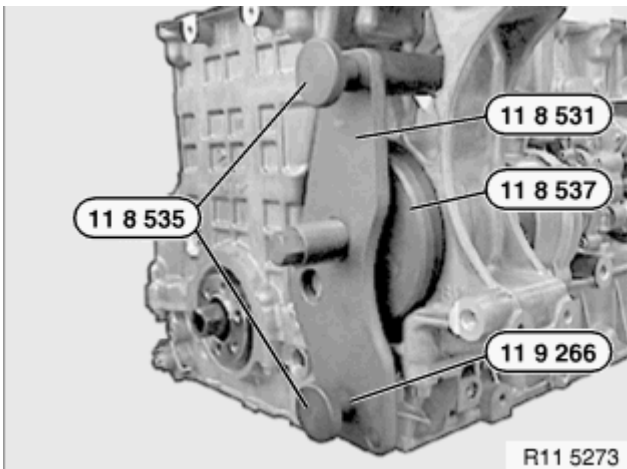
Secure special tools 11 8 535, 11 8 531, 11 8 537 and special tool 11 9 266
